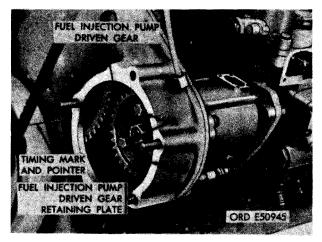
REMOVING OR INSTALLING FUEL INJECTION PUMP DRIVEN GEAR RETAINING PLATE . (14) Remove fuel injection pump driven gear as shown in figure 67.
